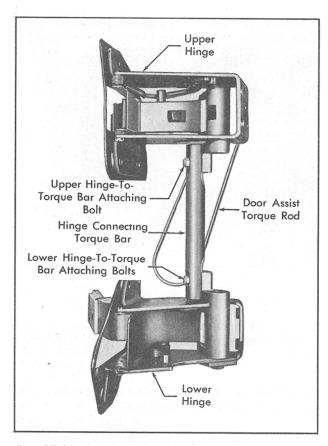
Rear Door Hinges and Connecting Torque Bar
